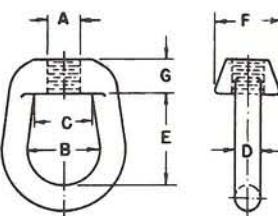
Weldless Eye Nuts are of Forged Steel to ASTM-A-235 Class C.
